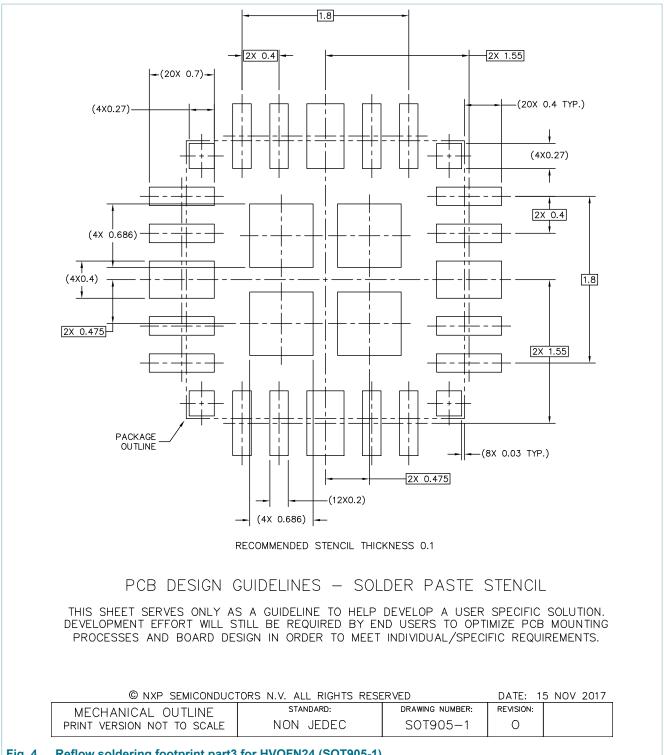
Reflow soldering footprint part3 for HVQFN24 (SOT905-1)
